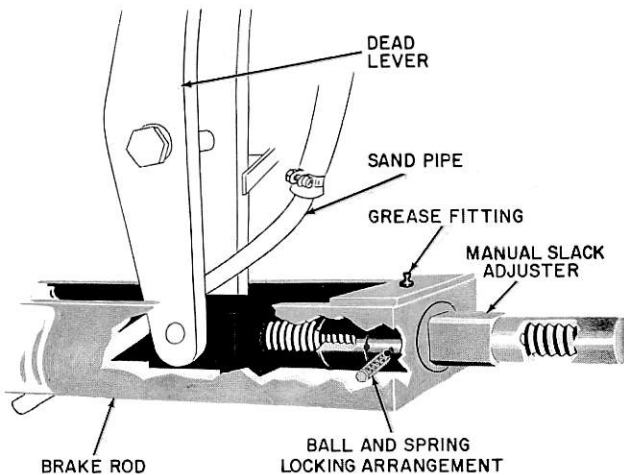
Cutaway view of manual slack adjuster (E-11698)
